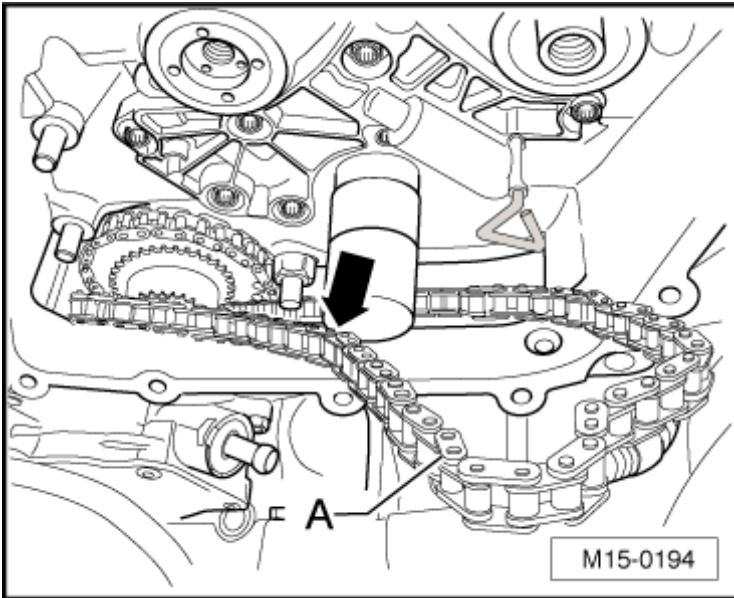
Holding Timing Chain To Be Able To Lay It Under Pipe Connection
